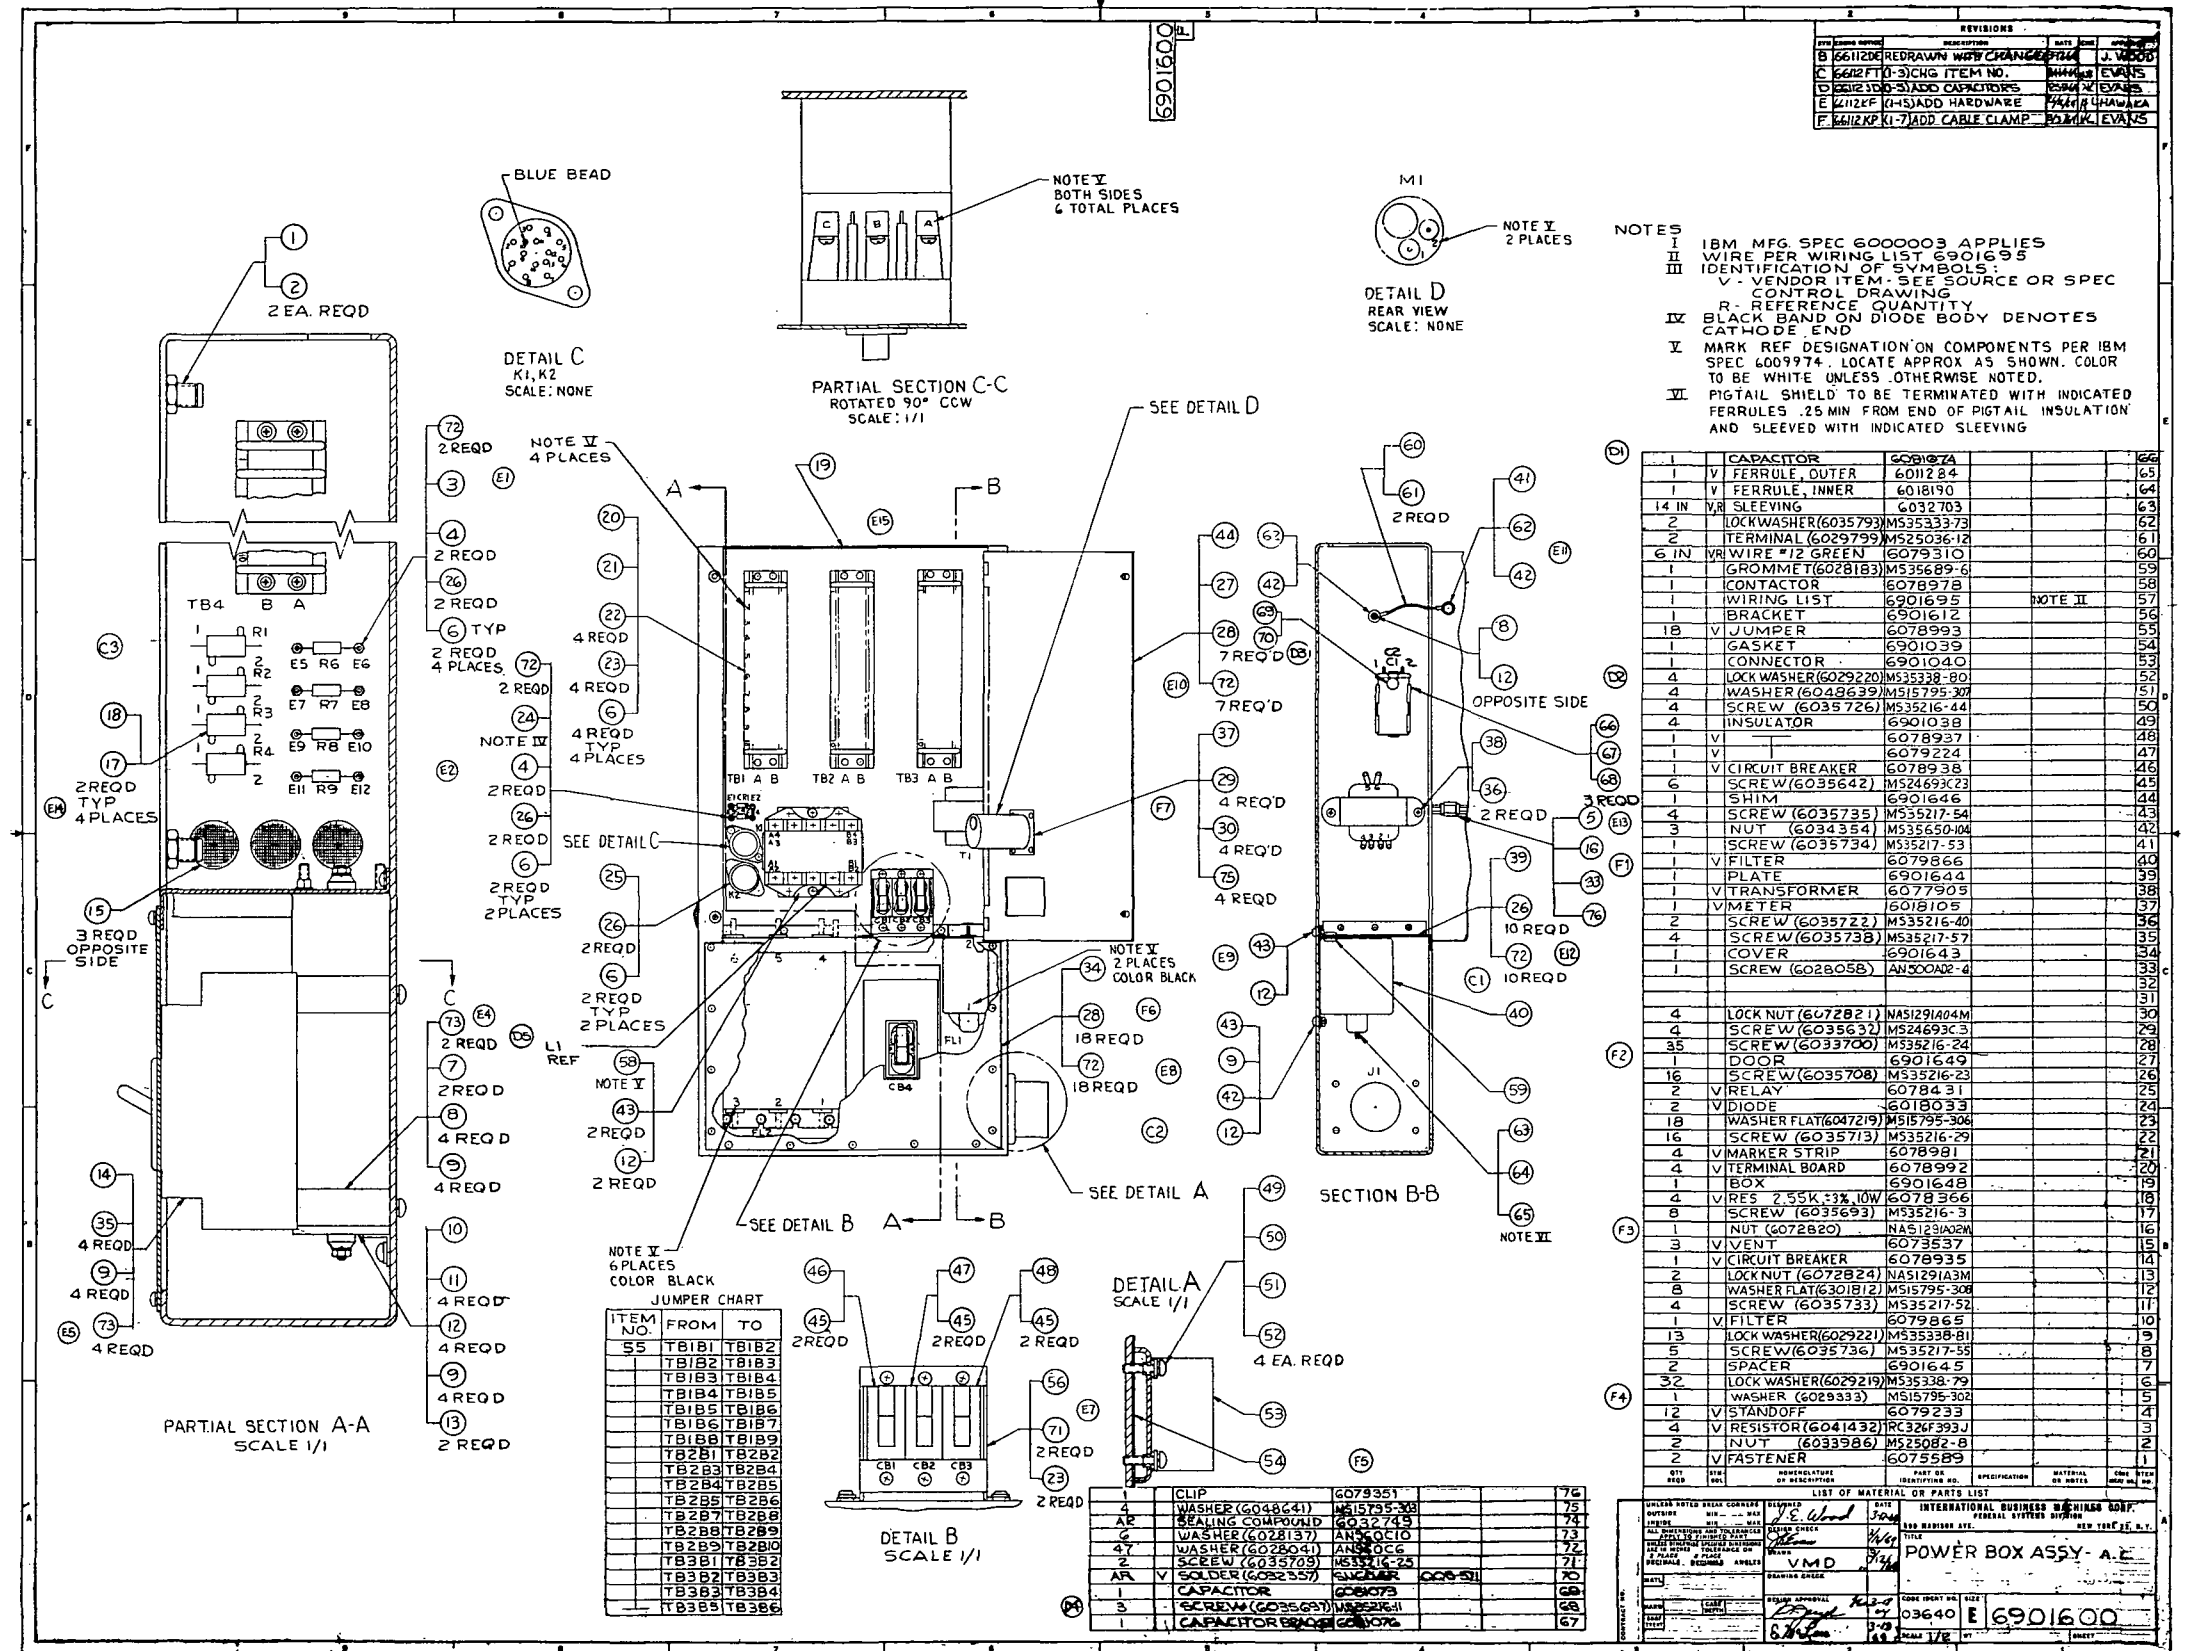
AC Power Gate (01B5) Assembly Drawing
